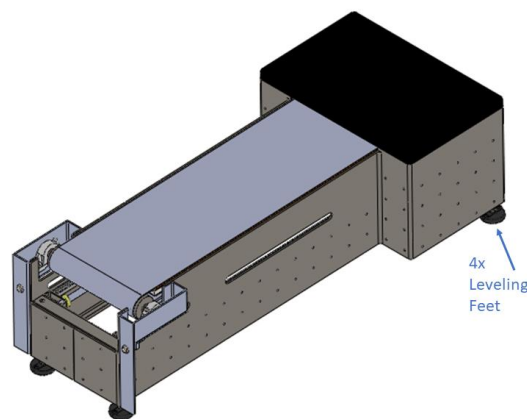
Isometric View of Treadmill Showing Rear Flanges and Leveling Feet
